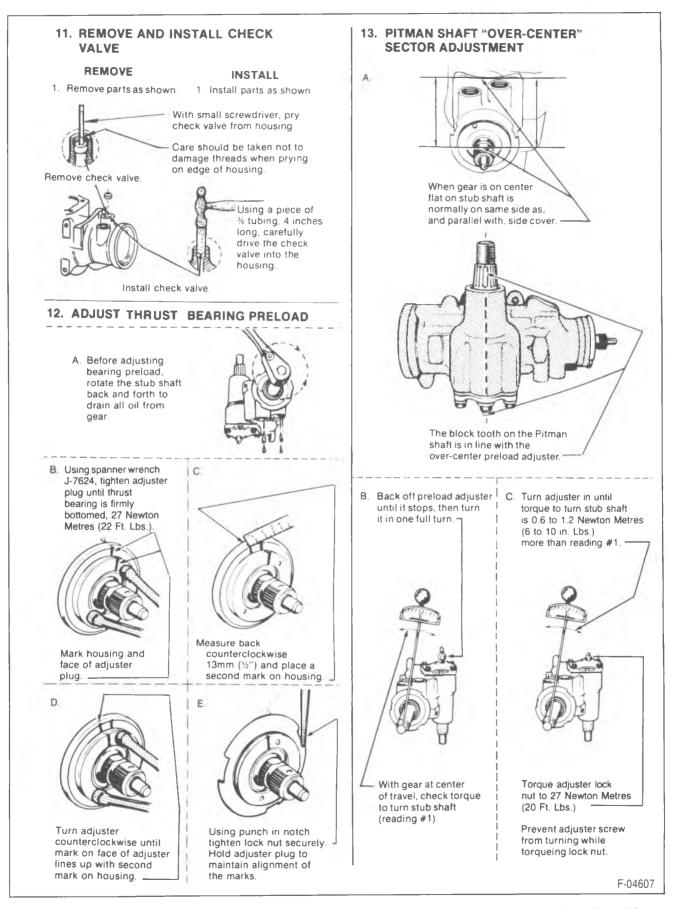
Removing and Installing the Check Valve and Adjusting the Thrust Bearing Preload and Pitman Shaft "Over-Center" Sector
